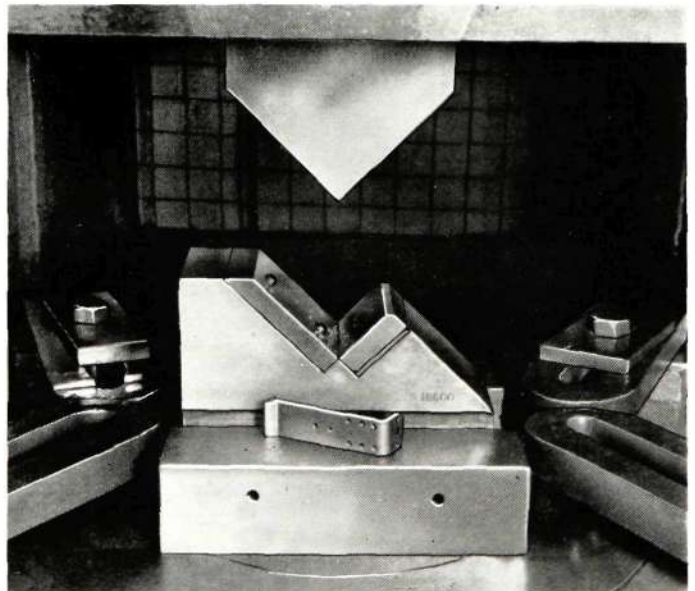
The press tools here shown, for setting the 90-deg. lug angle, incorporate conical punches for coin-countersinking the pierced holes
